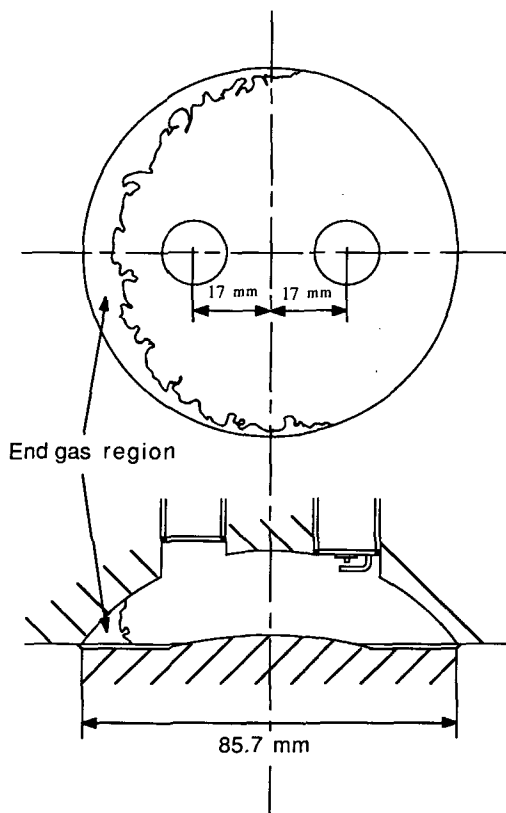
Engine geometry showing spark plug and pressure transducer positions and location of end-gas region for the Ricardo single cylinder spark-ignition engine.
